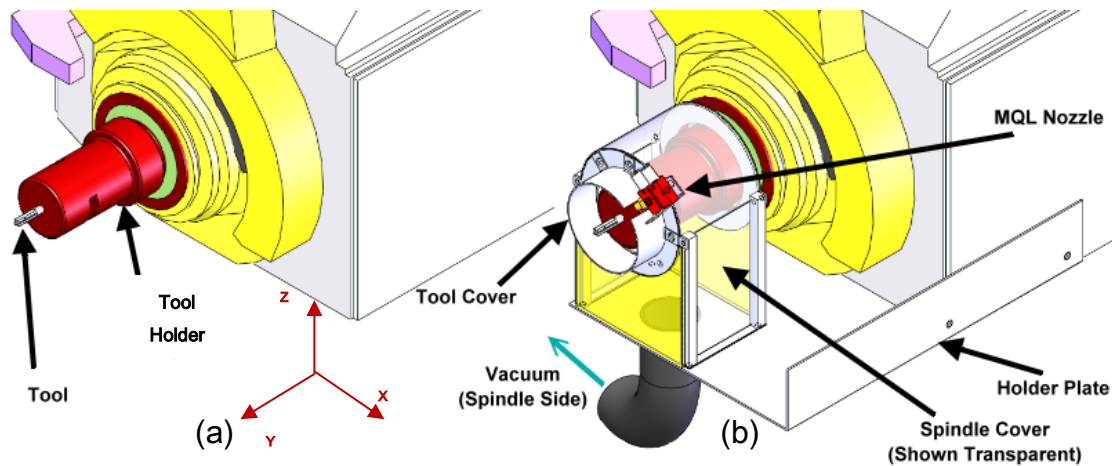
CNC Machine spindle head with the experimental machining setup.
